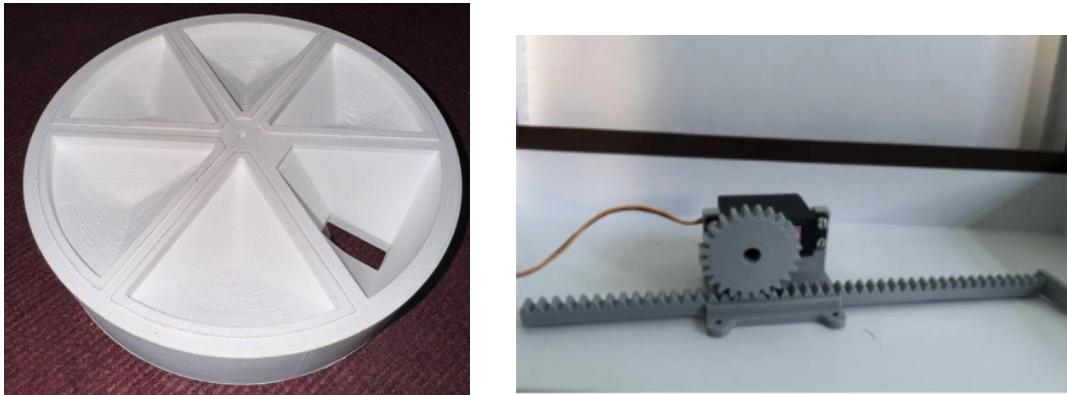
Fabrication and assembly stages of the automatic pills dispenser prototype with 3D-printed mechanical components and integrated electronics.
